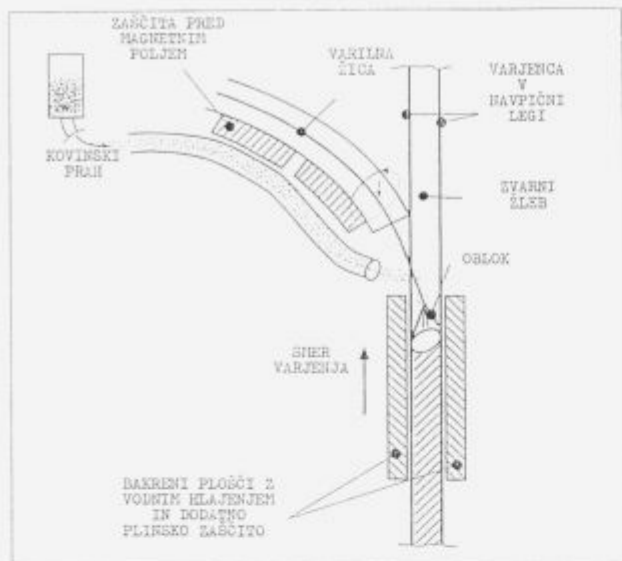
Schematic representation of submerged arc welding with metal powder addition
